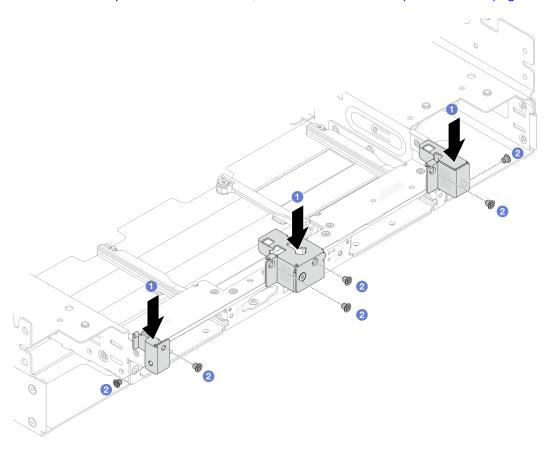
Installing rearwall brackets for the 8 x 2.5" rear drive cage assembly
